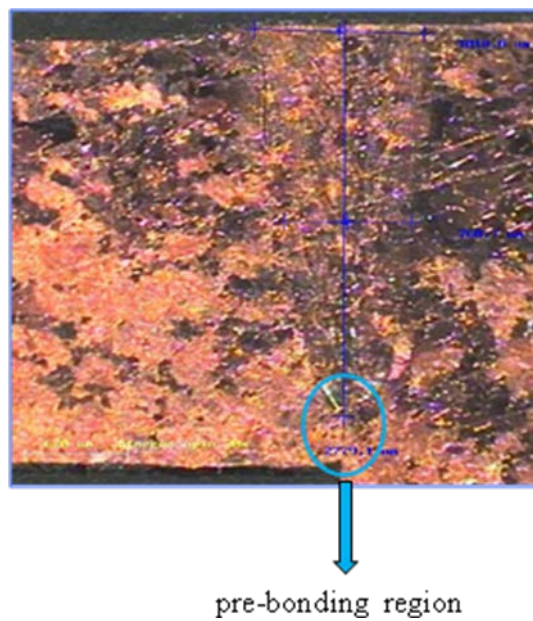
Welding region zoom of the prototype cross section after the EBW process
